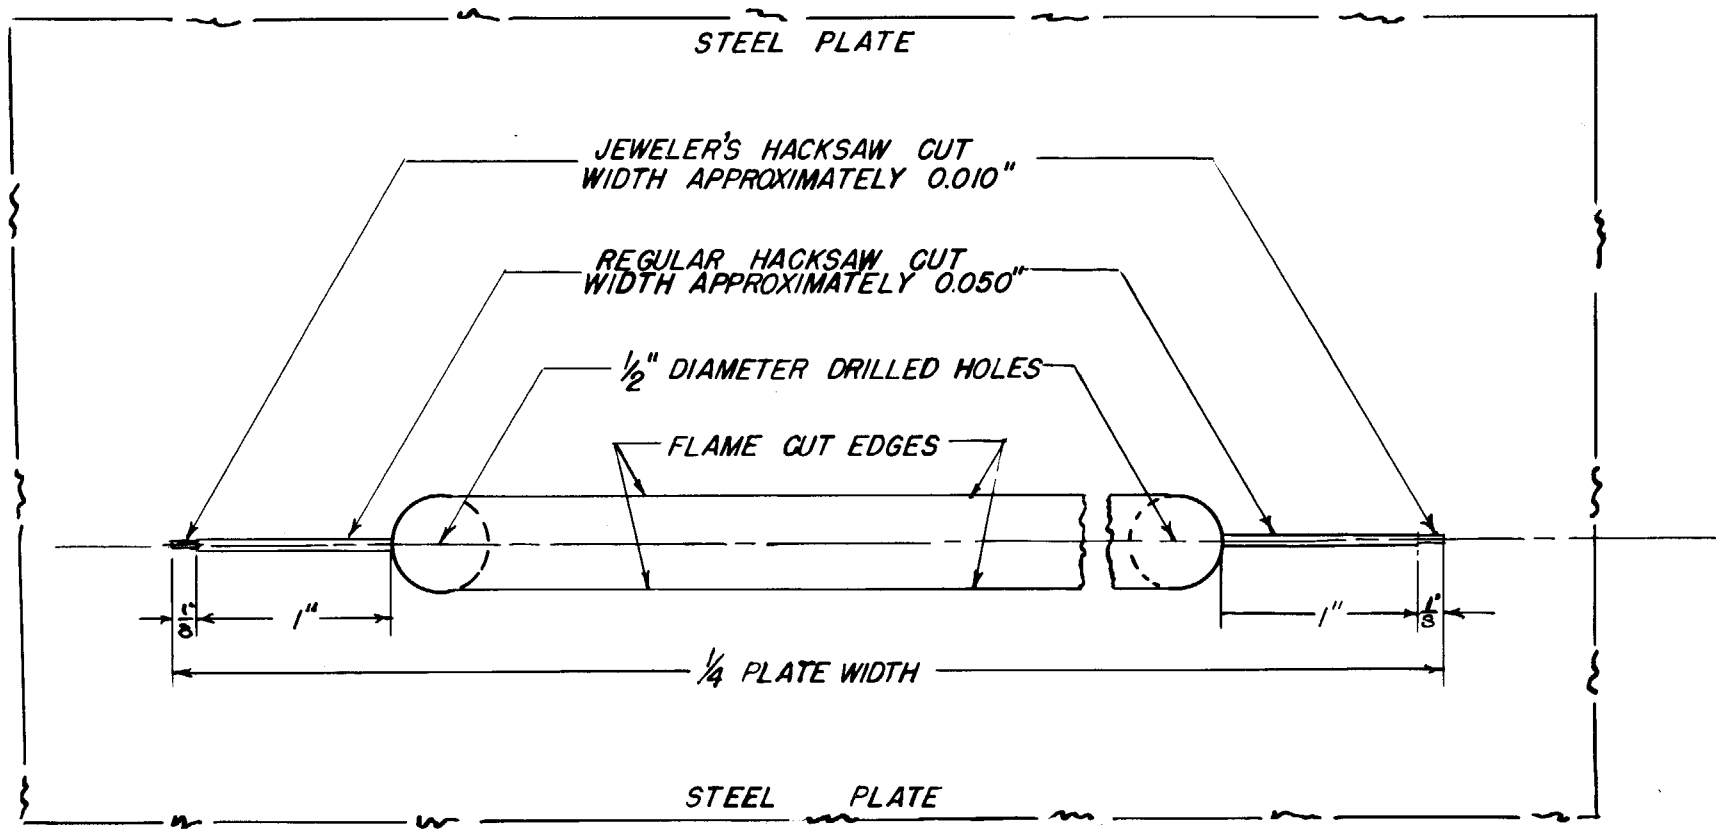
DIMENSIONS OF NOTCH USED IN FLAT PLATE TESTS
